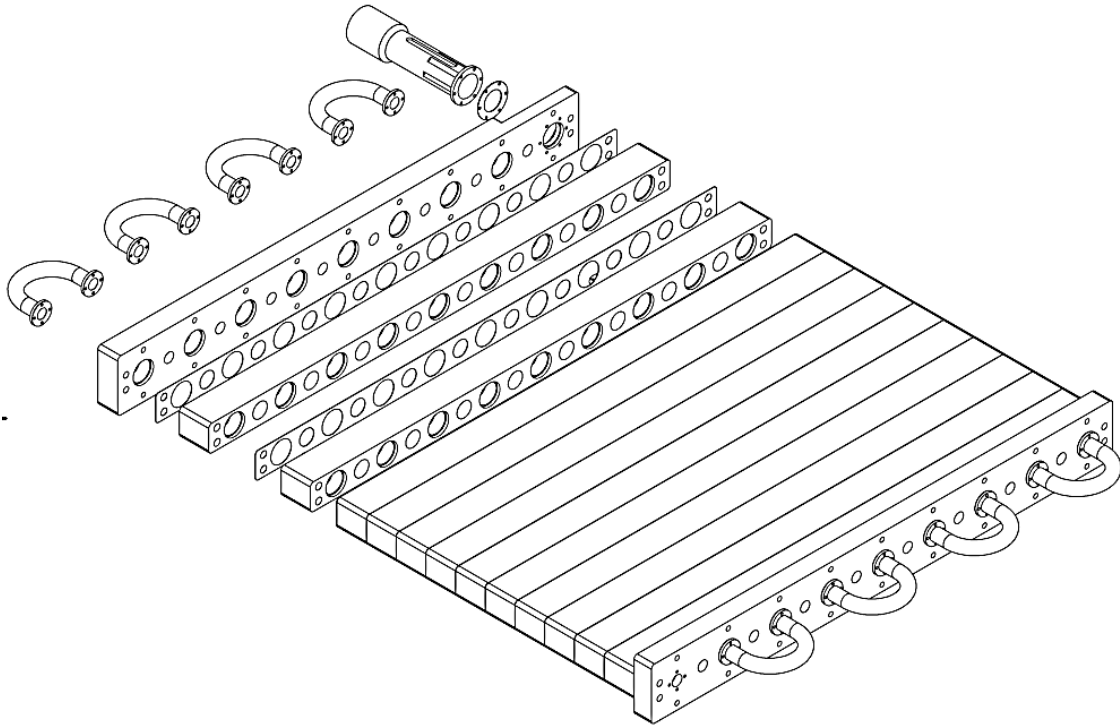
Exploded view of basic alignment assembly (Not showing assembly components). Showing the U-bend tubes, the end plates (Compression plates) and oscillatory mechanism plunger housing which connects the mechanism with the reactor, facilitating the oscillatory flow regime.
